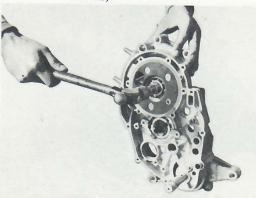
Removing crankshaft from crankcase with a hammer
